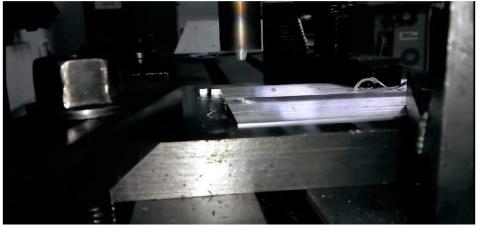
Lifting of tool bit after performing FSW welding
